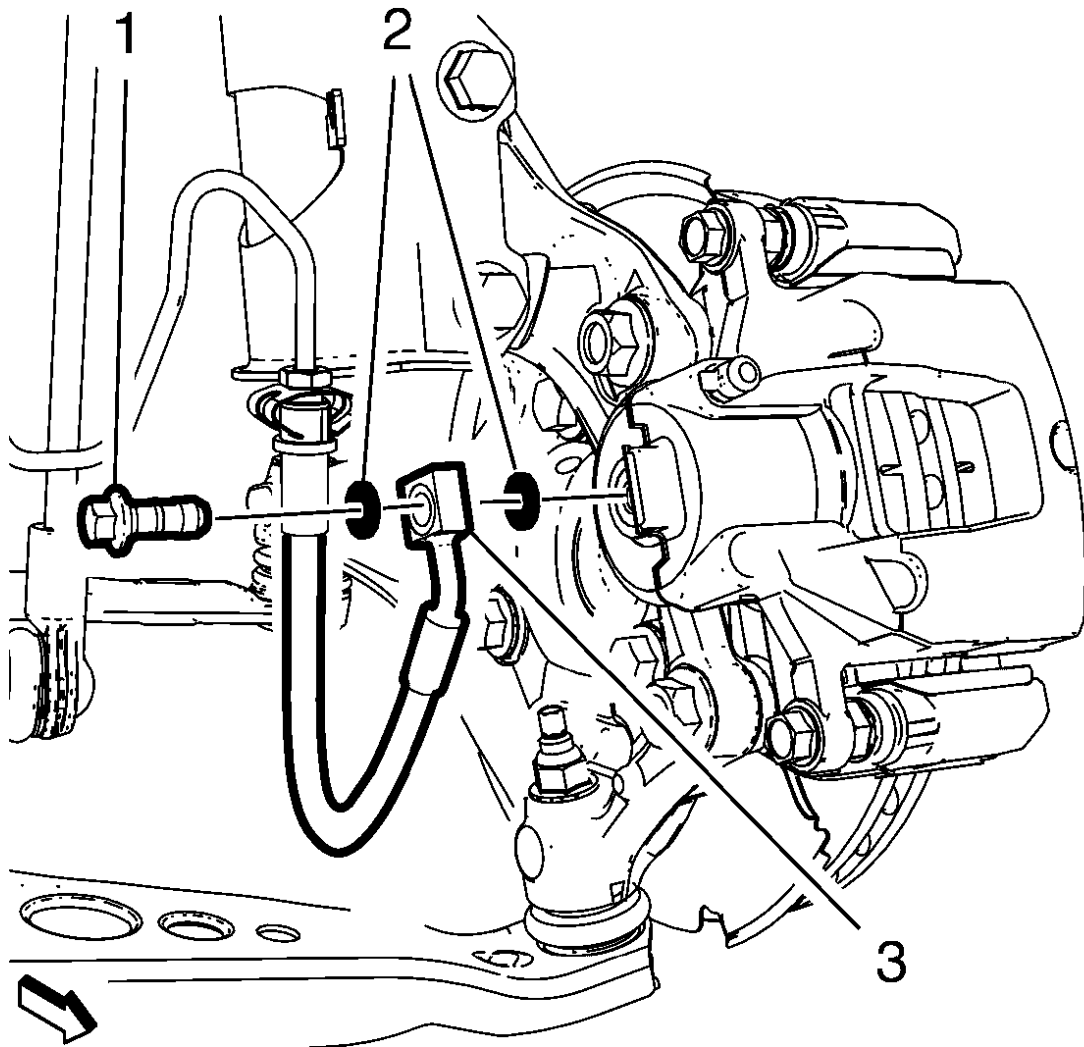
Front Brake Hose And Brake Hose Fitting Bolt
